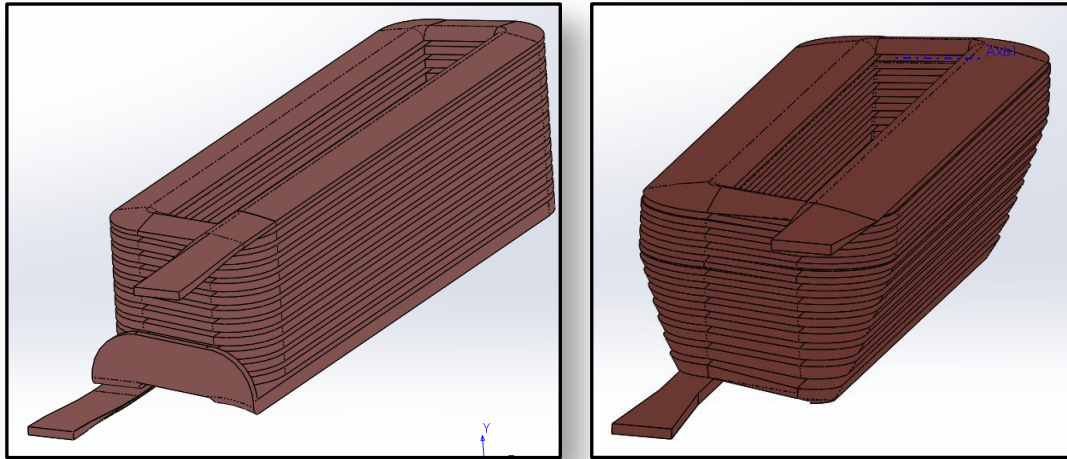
CAD design of electrical coils to be 3D printed, a 'block' shaped coil (left) and a 'wedge' shaped coil (right).
